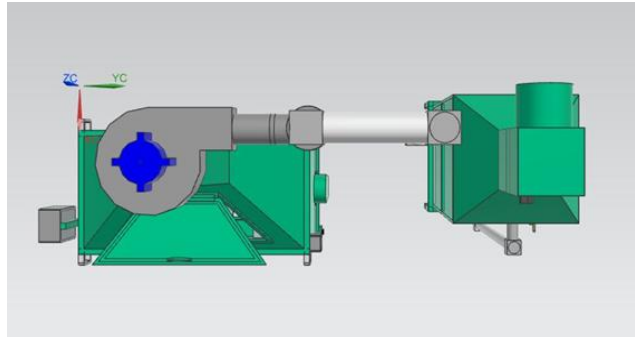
Top view and 3D design of the burner-wet scrubber system showing blower and gas flow configuration
